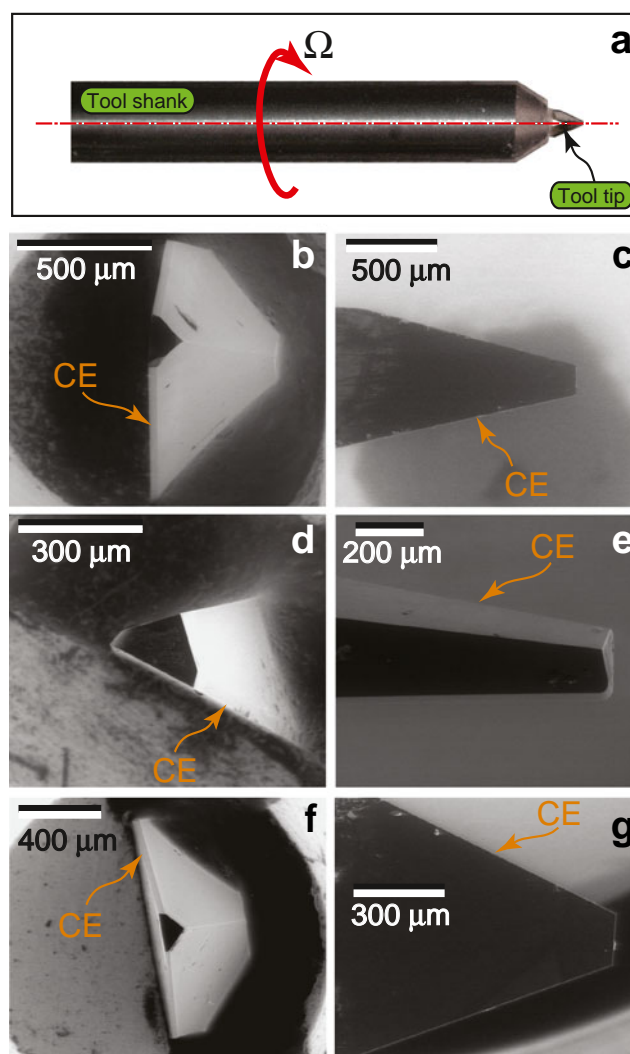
Geometries of custom-made diamond tools (CE indicates the cutting edge). (a) Overall view of a diamond micro-tool with meso-scale tool shank, (b–c) top and side views of a V-shaped tool with 15° apex angle and 300 μm diameter, (d–e) top and side views of a straight diamond tool with 450 μm diameter, (f–g) top and side views of a straight diamond tool with 5° back rake angle and 850 μm diameter.
